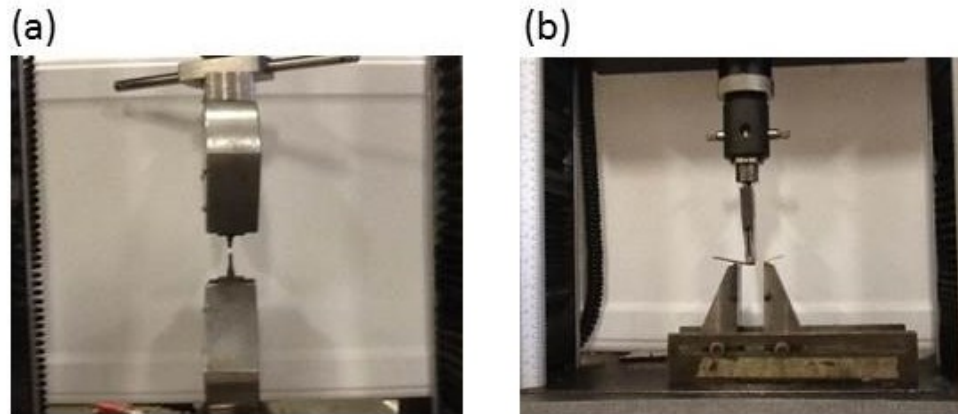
(a) Alloy 625 samples after tensile test (b) an image of bend test on alloy625 sample.
